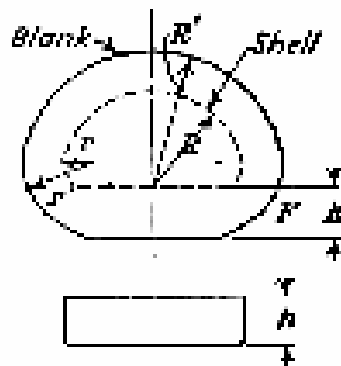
Layout of a blank for a kidney-shaped shell.
